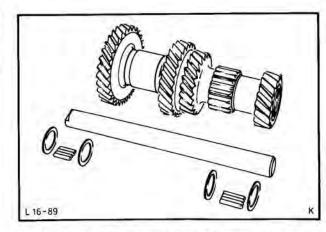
Countershaft gear train with shaft, spacer shims and needle rollers
